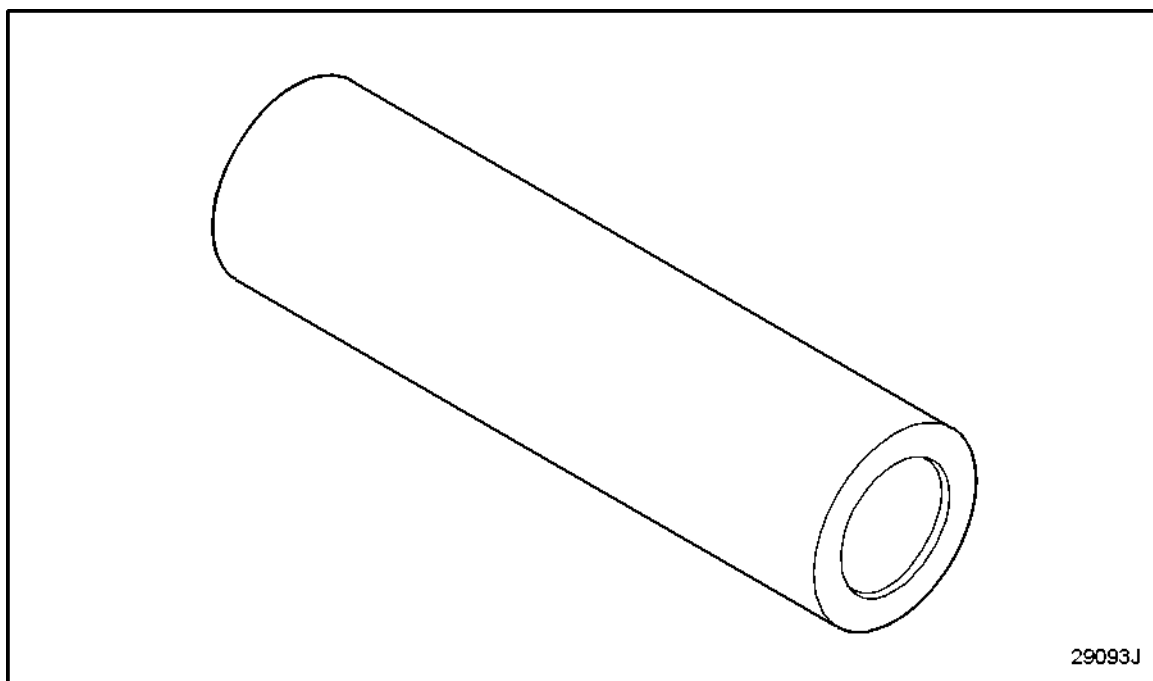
Drive Shaft Dear INST (6.01") (6/8V),J 22398
